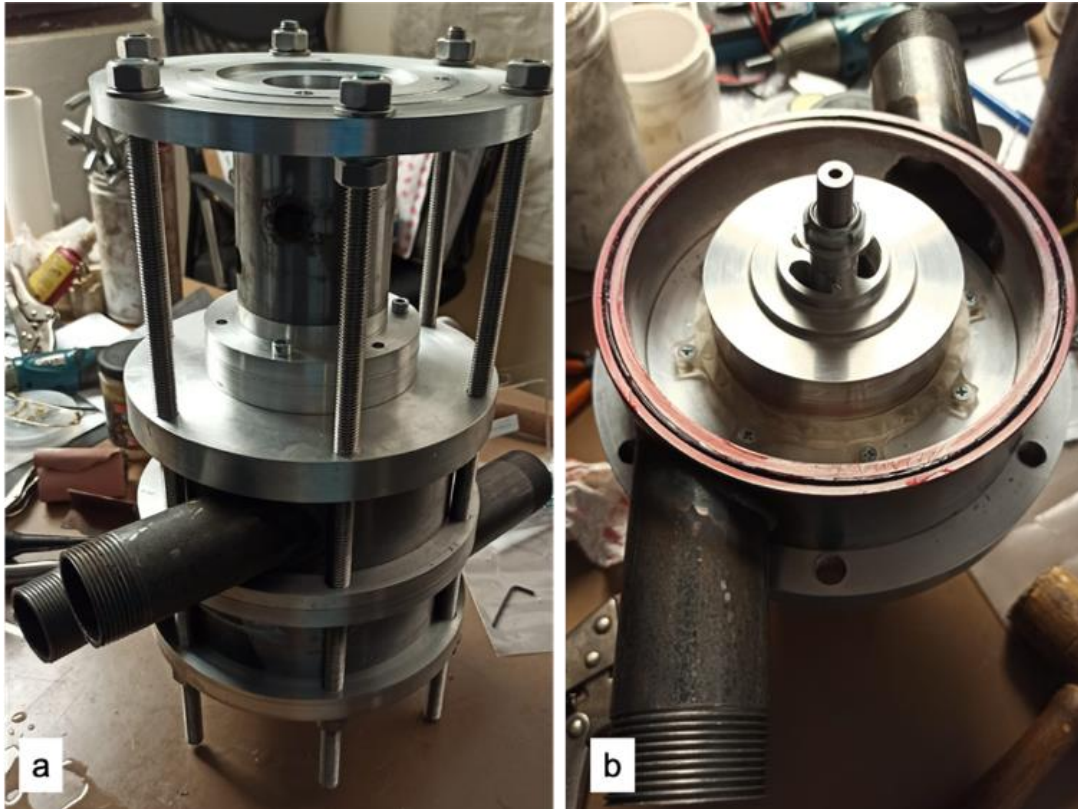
Water expander: (a) assembly, (b) turbine showing rotor and inlet ports
